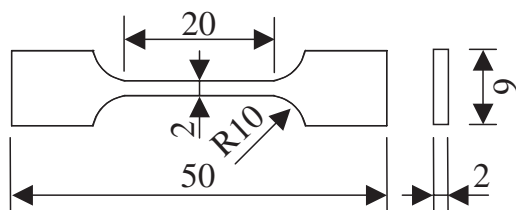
Schematic drawing of specimens for loading–unloading tensile tests in mm.
